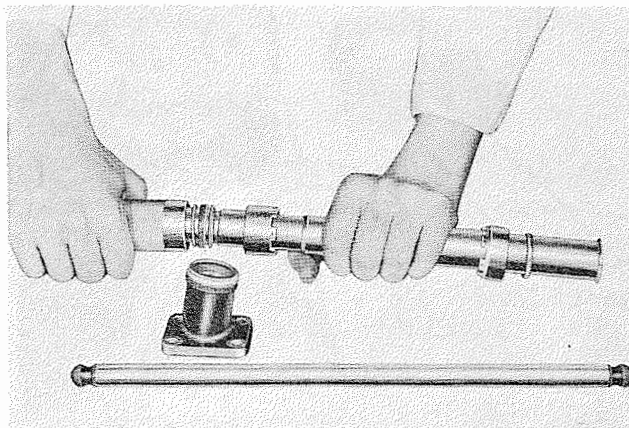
Installing Lower Packing onto Push Rod Housing
